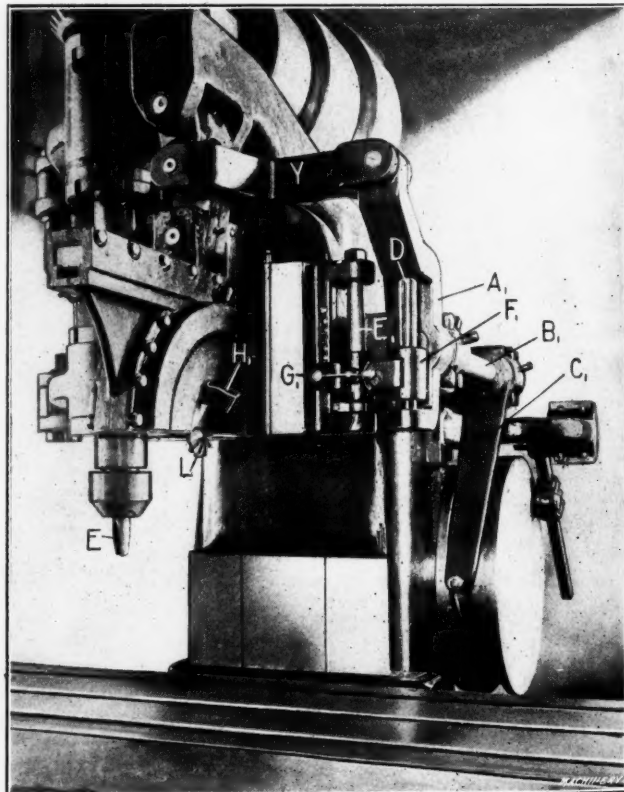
Front View showing Relieving Mechanism for the Die-sinking Cutter
